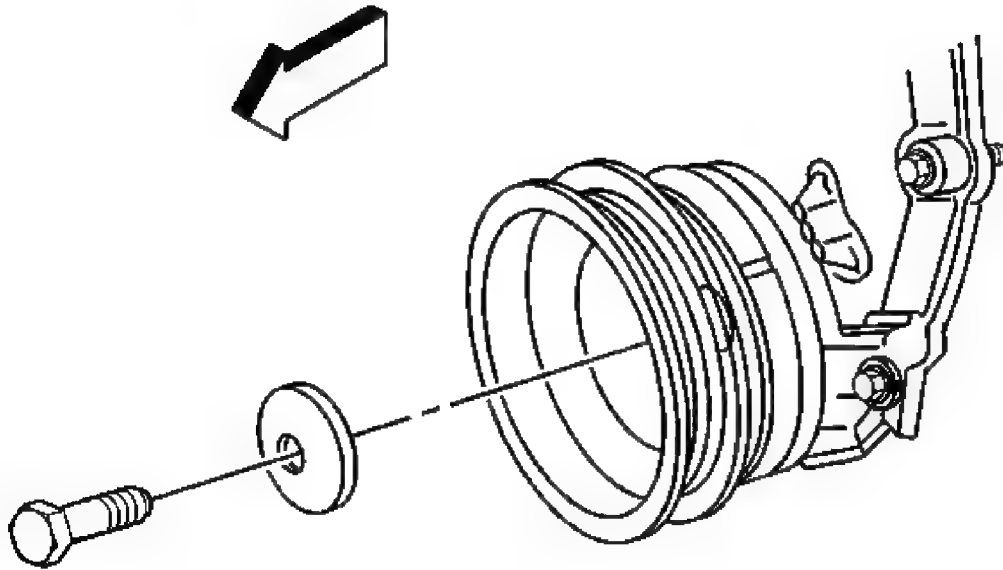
View Of Crankshaft Balancer Washer & Bolt
